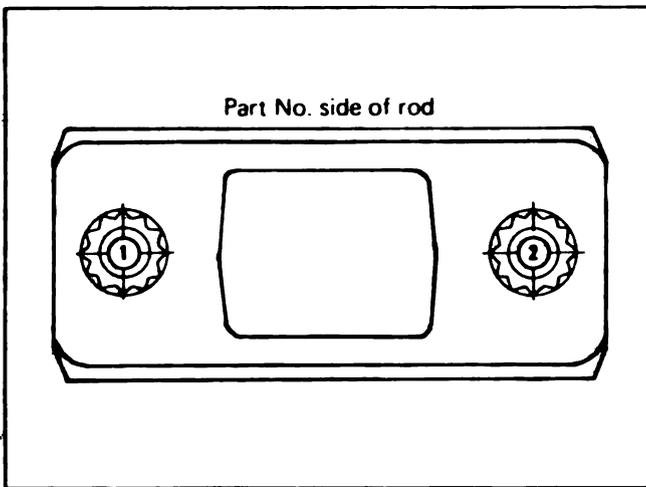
(N114222). Tightening Sequence For The Connecting Rod.
